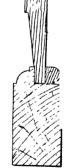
Section of Door Stile of Writing Table Cupboard.
